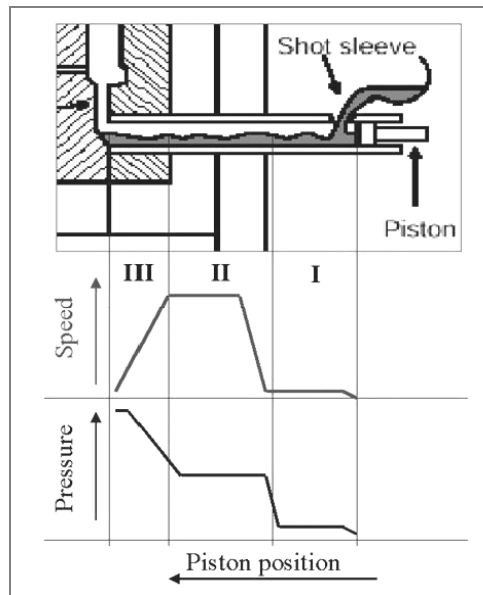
A schematic view of typical injection-control stages during high-pressure die casting.²⁹
